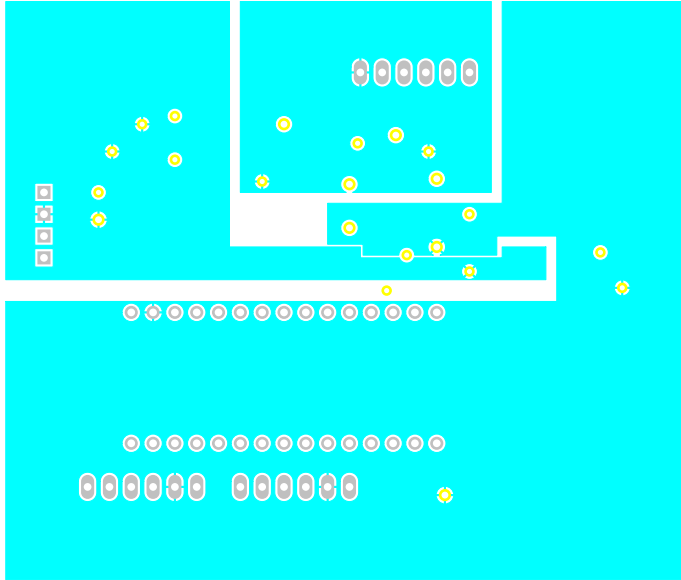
The third layer of the PCB. This layer is the power layer and is divided into three parts: 12 V, 5 V and 3.3 V.
